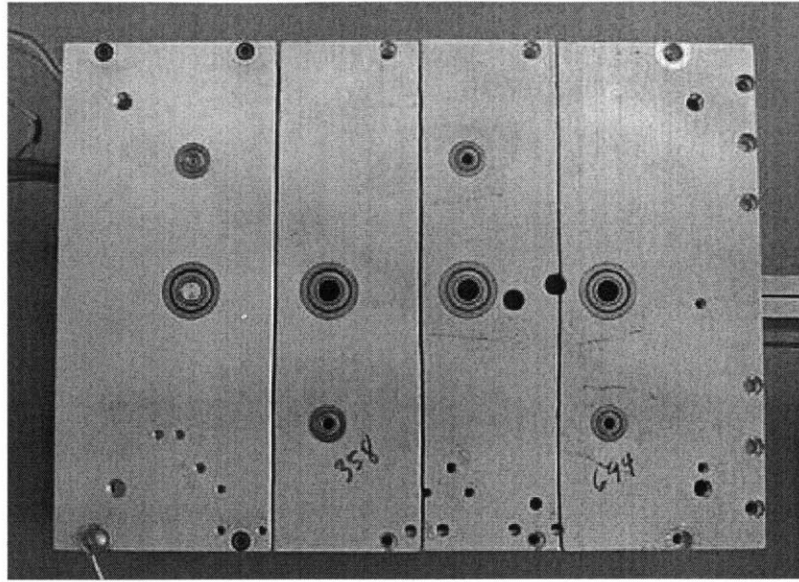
Picture of the top bearing plate for the finger motor box after sectioning.
